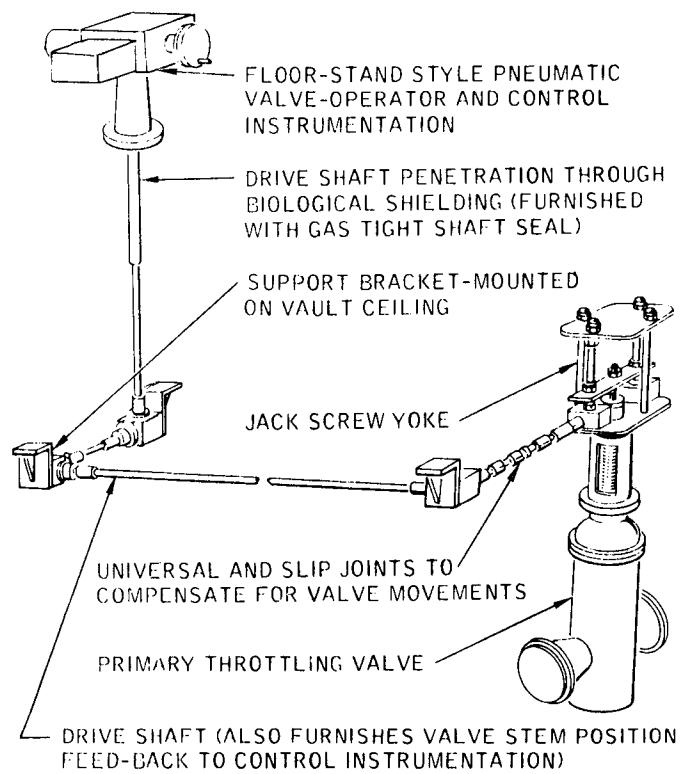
Typical Remote Valve Operator and Drive Shaft
